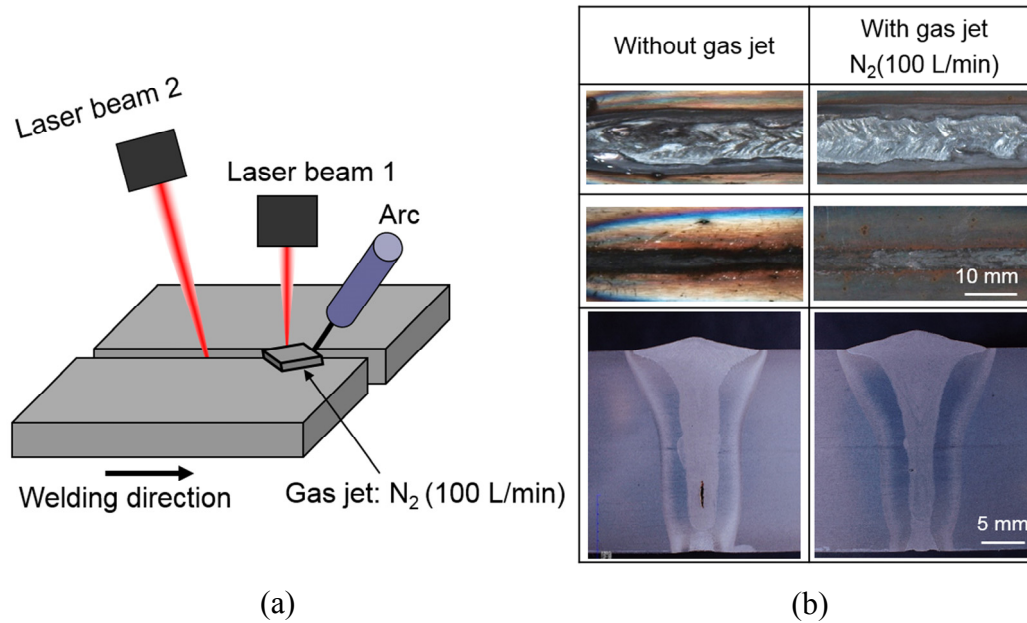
(a) Schematic representation of using gas jet. (b) Surface appearances and cross sections of weld beads produced by laser-MAG arc hybrid welding without using gas jet and with using gas jet.
